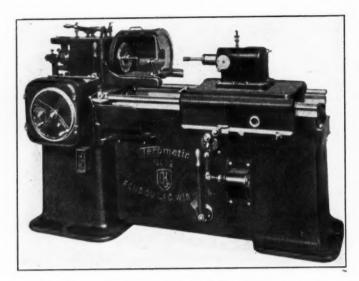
Teromatic Grinder which incorporates the electric motors in unit assemblies and rough and finish sizing are electrically controlled
